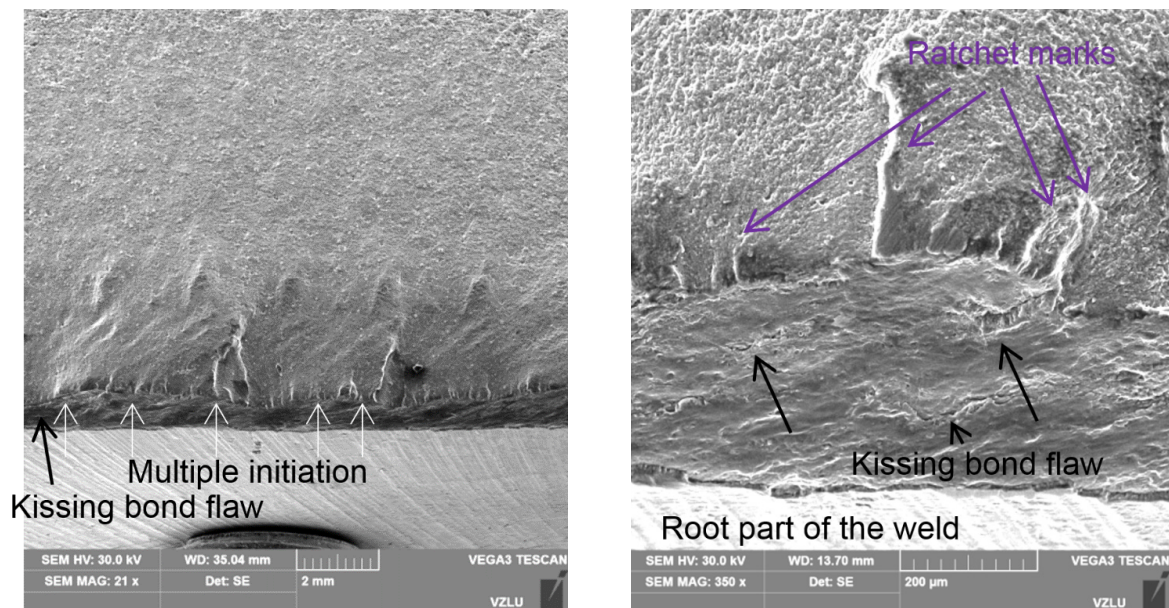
Fatigue crack initiation from the KB flaw notch observed by electron microscopy: left) multiple crack initiation in KB; right) detail of KB surface.
